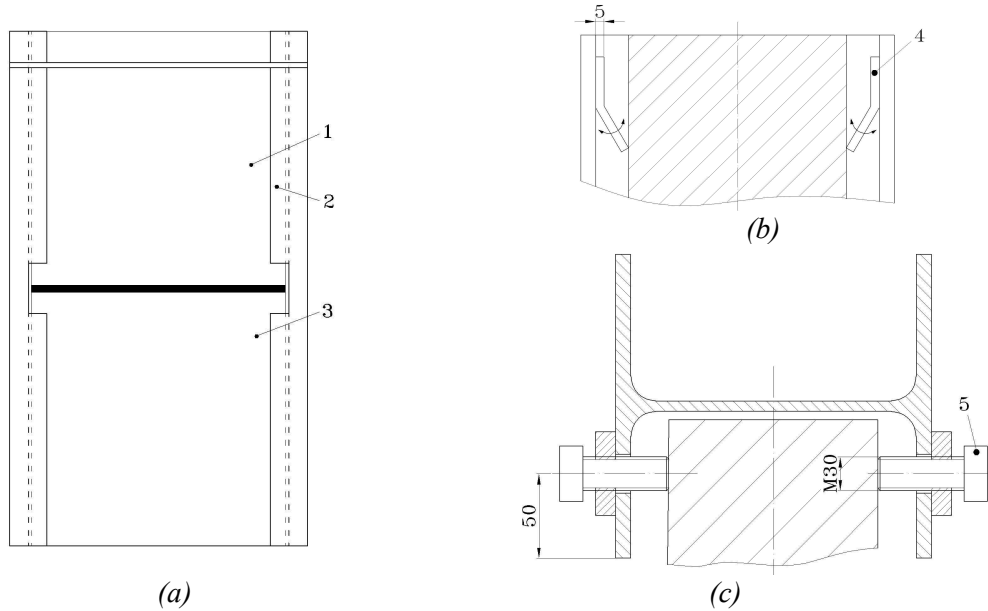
Plates fixture; a-general view; b-springs detail; c-bolts detail
